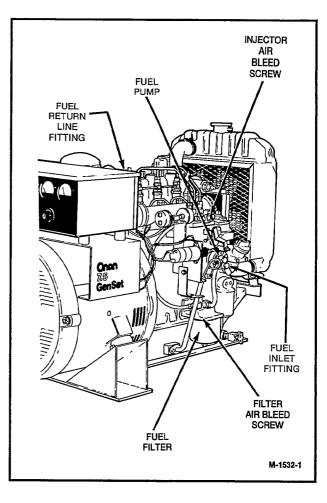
INJECTION PUMP FUEL SYSTEM
